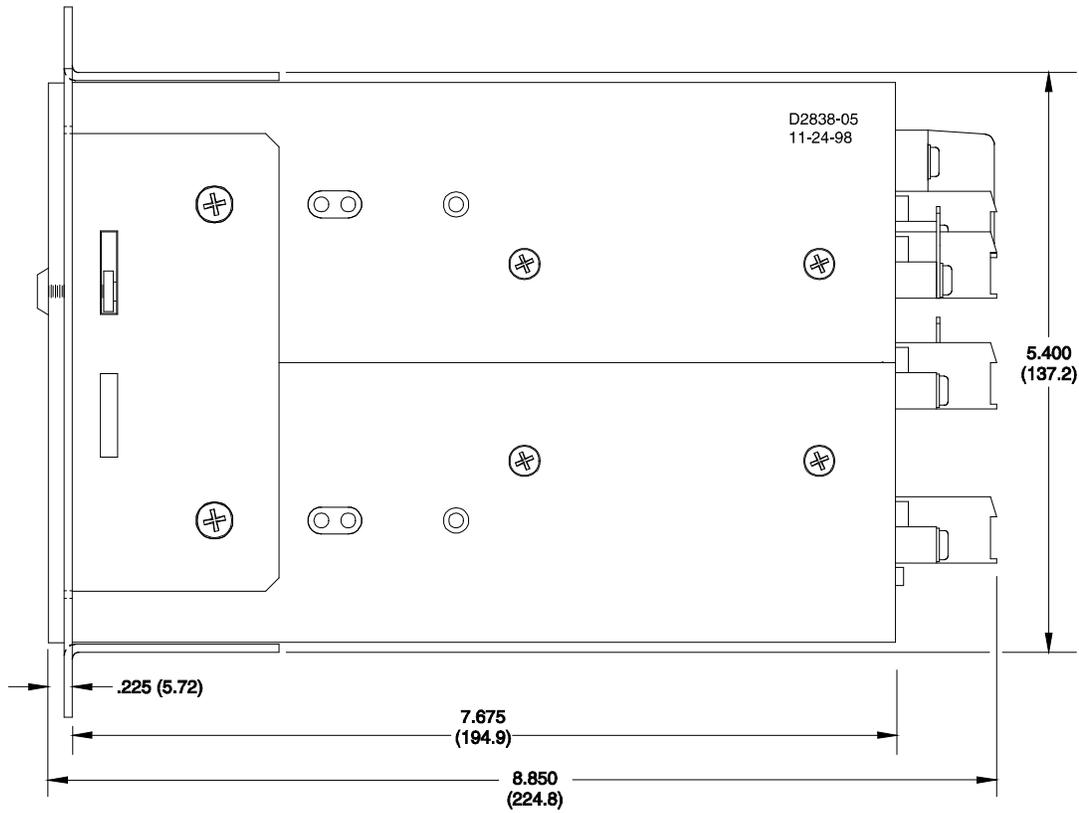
Panel Mount PSS-100 Outline Dimensions, Side View
